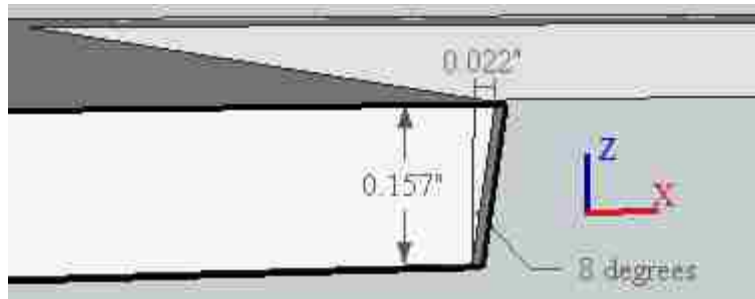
Inner edge divergence of the 20x20 cm² upper trimmer lead plate.
